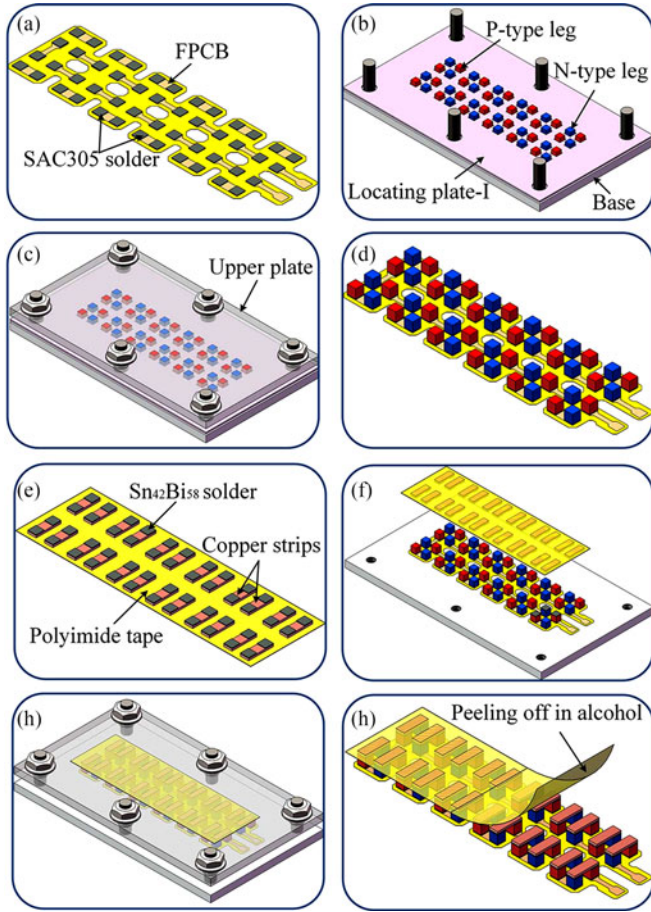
Fabrication process of wearable TEG device: (a) printing SAC305 solder paste on FPCB, (b) placing thermoelectric legs through the locating plate, (c) covering upper plate and soldering, (d) the fabricated hot-side of TEG, (e) printing  $\text{Sn}_{42}\text{Bi}_{58}$  solder paste on copper strips and glued by PI tape, (f) placing copper strips on the thermoelectric legs, (g) covering upper plate and then soldering, (h) peeling off the PI tape in alcohol.
